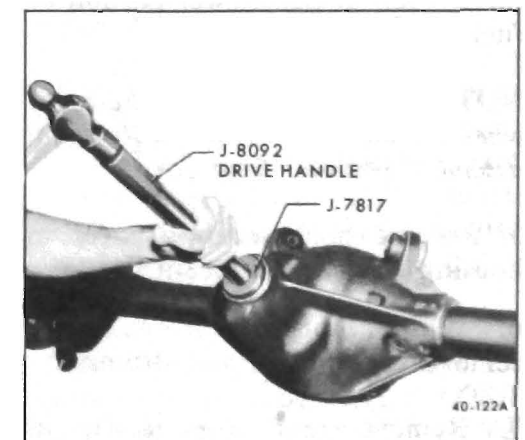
Installing Front Pinion Bearing Outer Race
